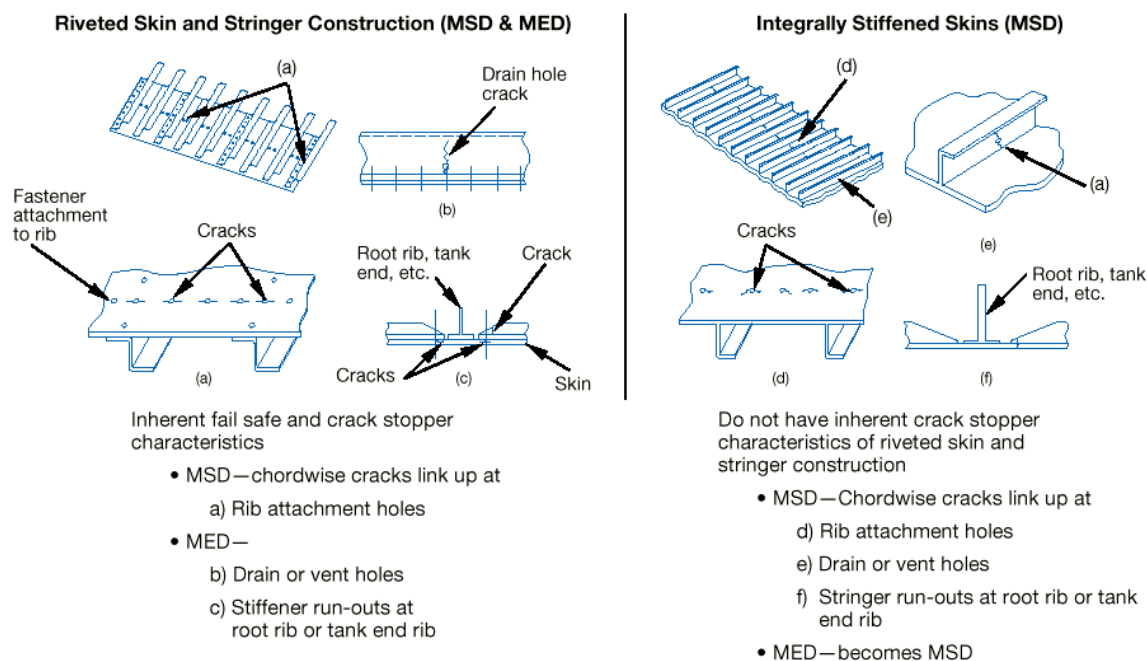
Typical Wing and Empennage Construction (MSD/MED)
